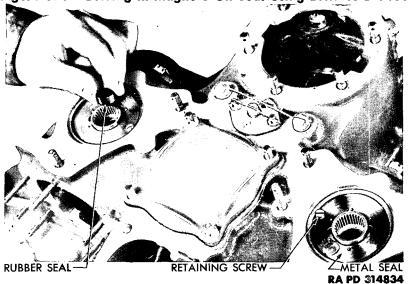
Placing Rubber Seal in End of Accessory Drive Shaft
